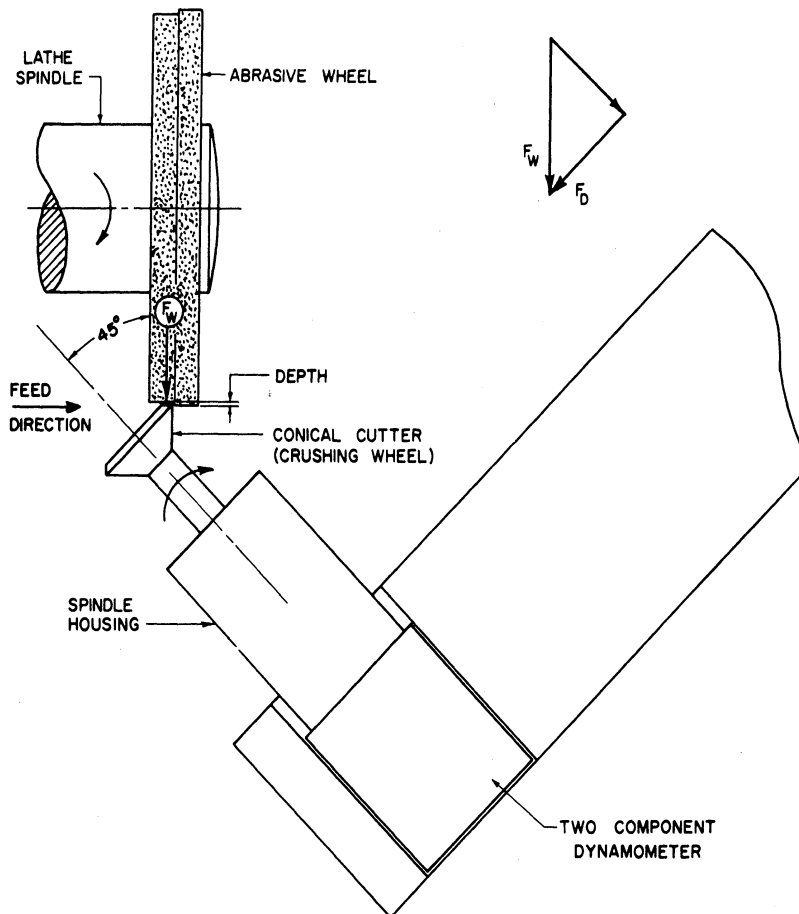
A schematic of the laboratory test set-up. A dynamometer is mounted on an extension plate substituted for the compound of a modified 12-inch swing engine lathe. Depth settings are made with the cross-slide, and feeding is accomplished with the carriage. Vertical and horizontal force components are indicated on the chart of a Model 60 Sanborn carrier-amplifier-recorder. Crushing wheel is S.A.E. 6150 steel hardened to 54-56 Rockwell C-scale.
